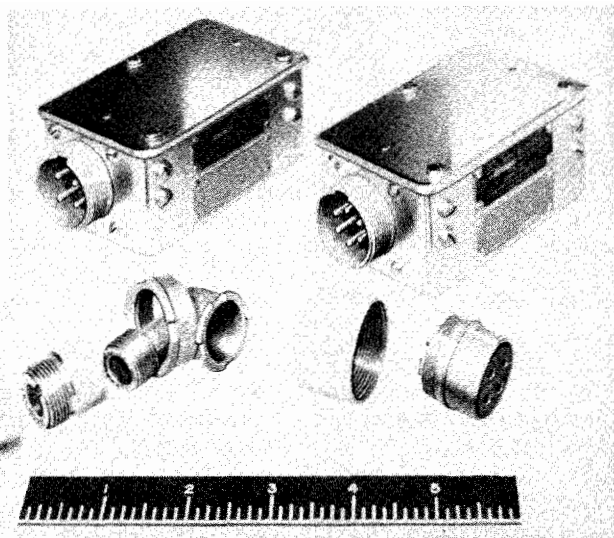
Jack Box BC-629-A, Jack Box BC-630-A - Assembled - Showing Cable Connector Construction
